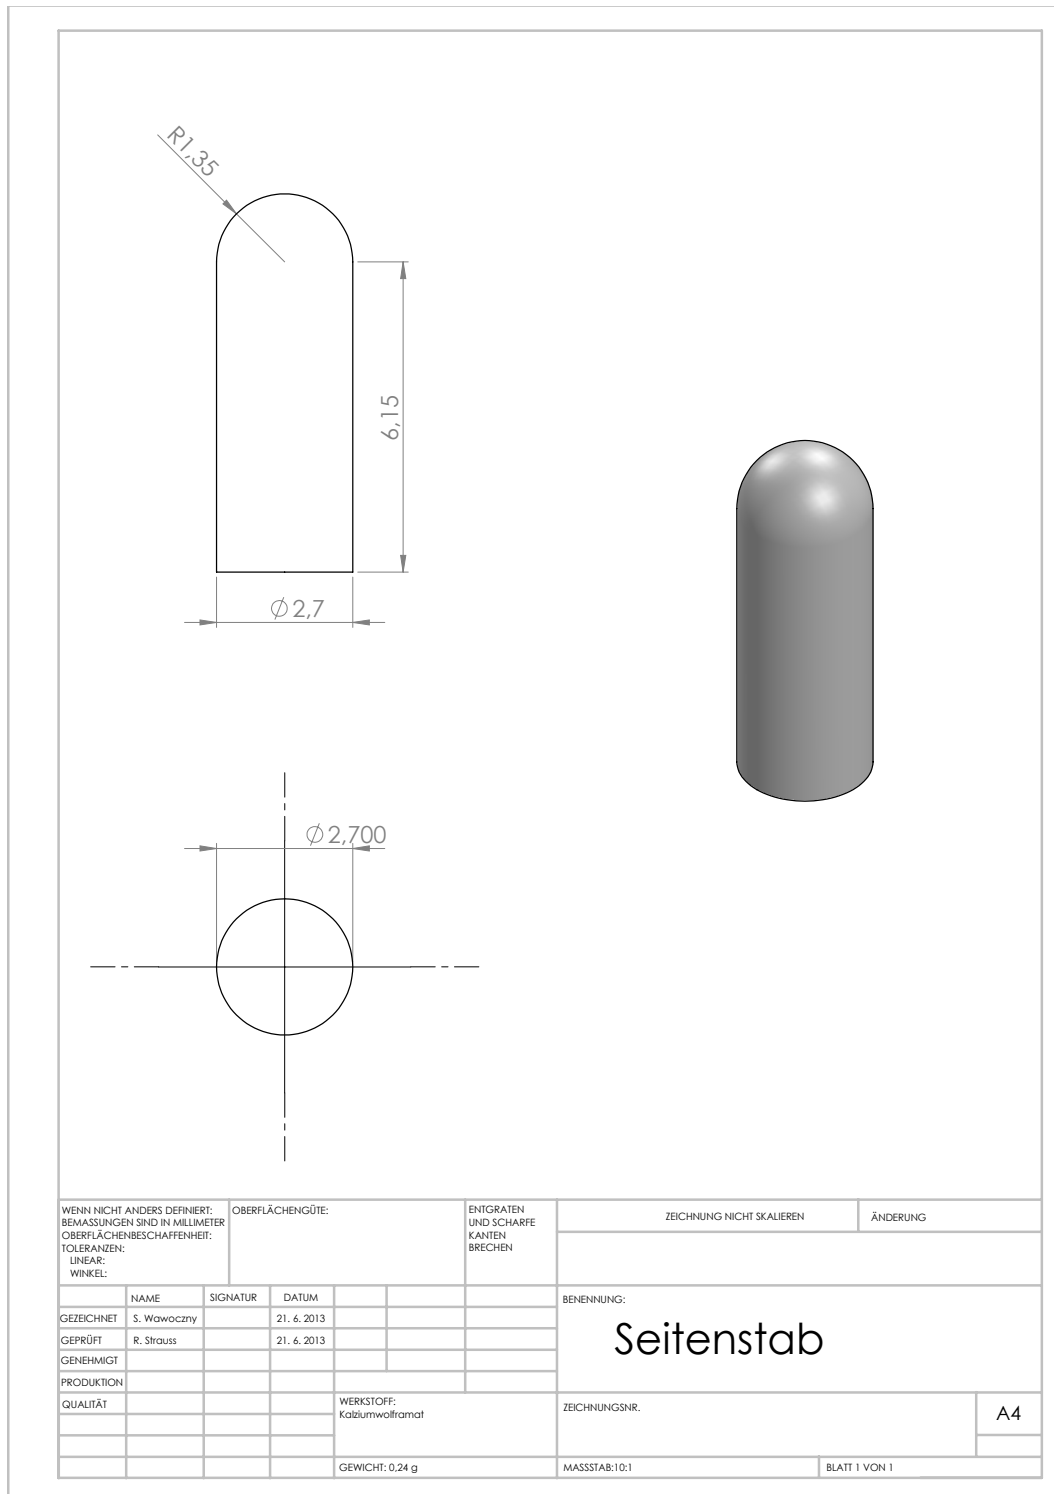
Technical drawing of a side CaWO_4 stick. The tip surface is polished spherically. The bottom surface and parts of the lateral surface (3 mm in height from the bottom surface) are coated with ultrapure Al (thickness: 20 nm).
